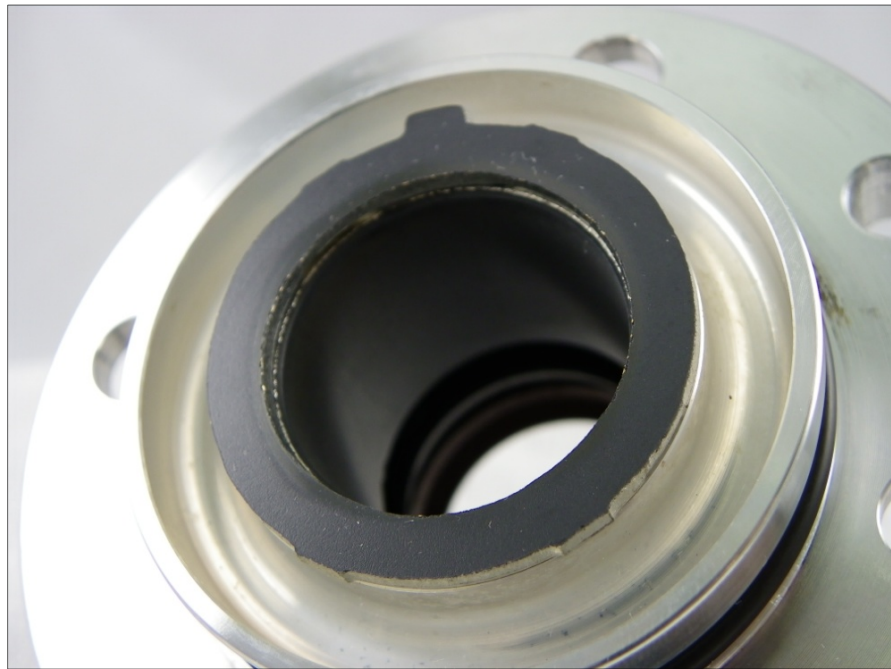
Font Pump Body Camshaft Bushing, SPK
